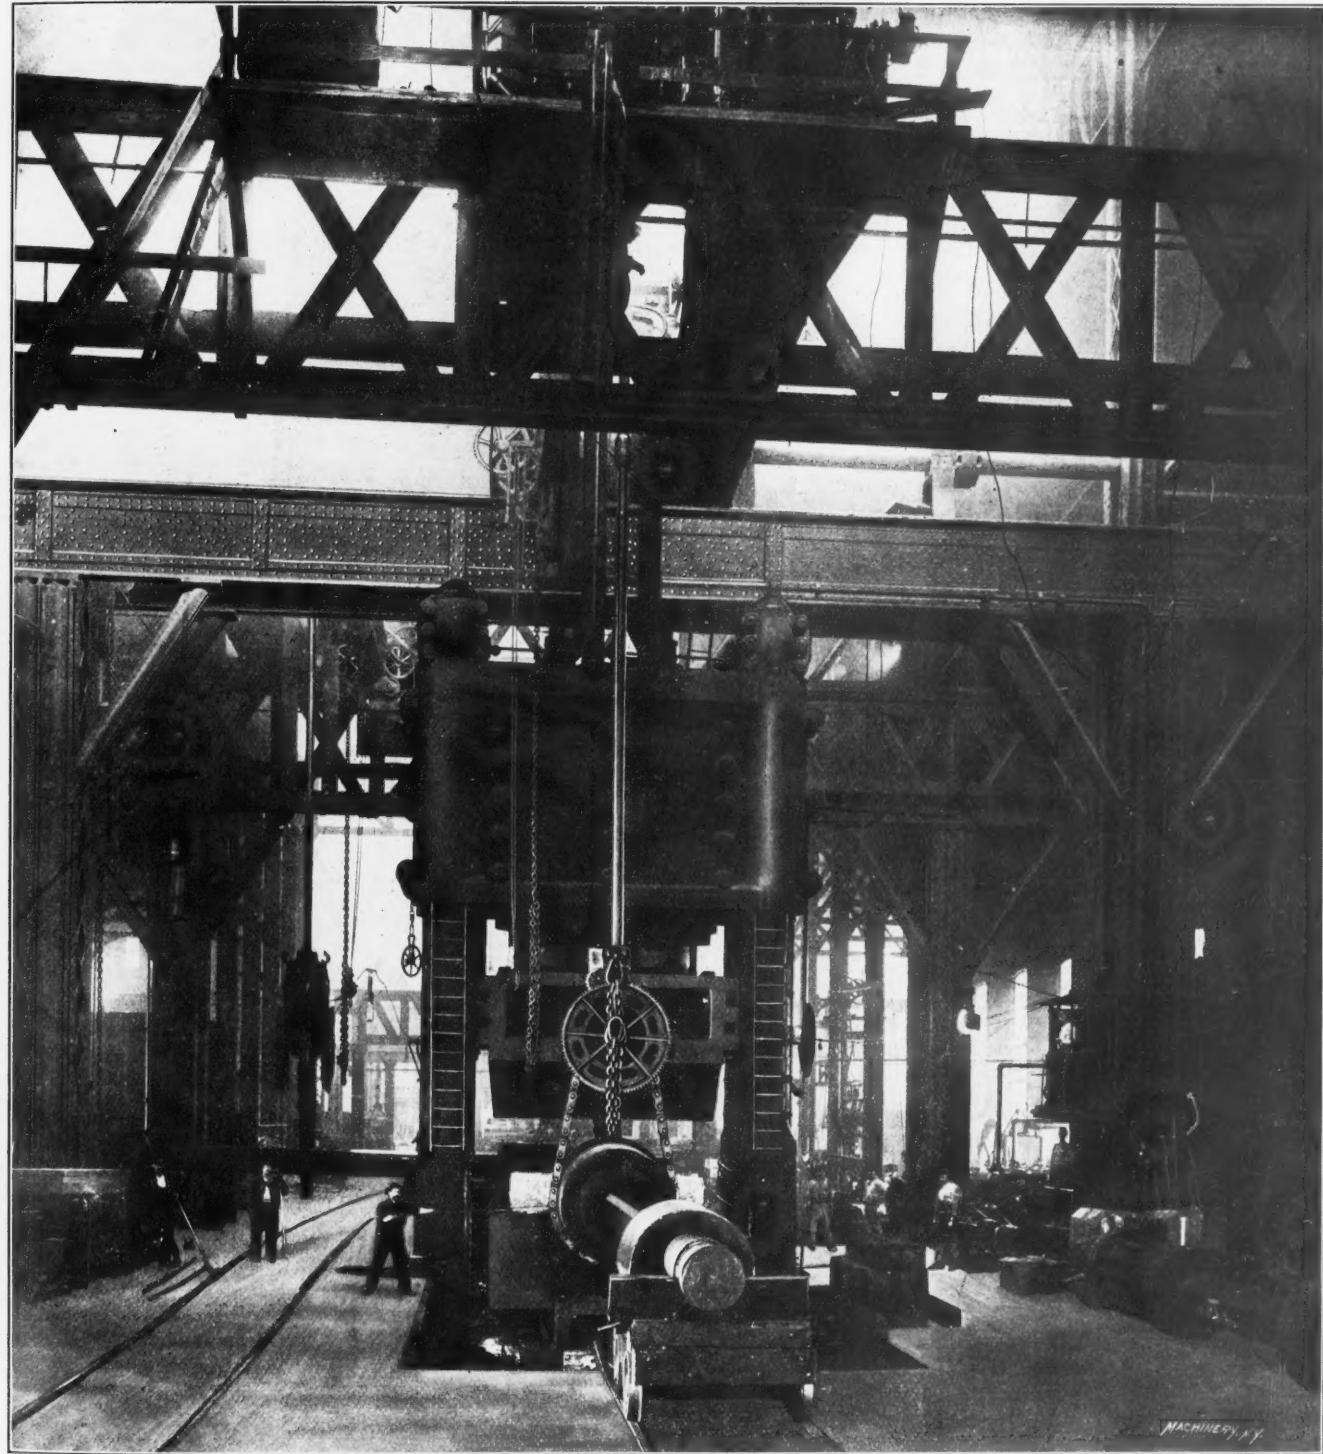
An Ingot being worked to Shape beneath the 16,000-ton Press of the Bethlehem Steel Co.
